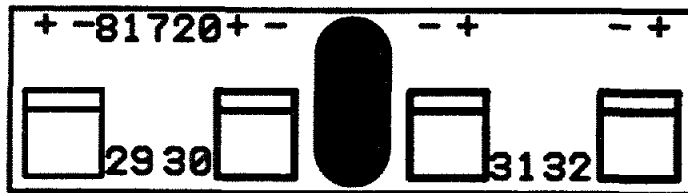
81720 LED BOARD COMPONENT LAYOUT
